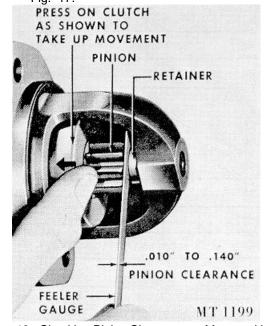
Checking Pinion Clearance on Motors with the Intermediate Duty Clutch
